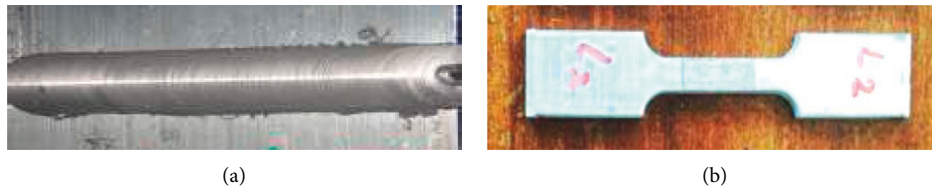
(a) Visual inspection of the FSW joint. (b) FSW tensile specimen.
